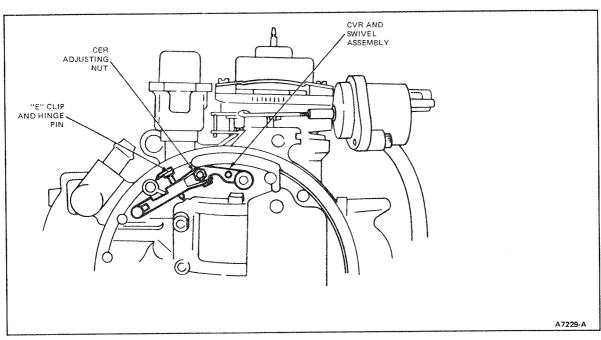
Control Vacuum Regulator (CVR) Swivel Assembly Replacement
